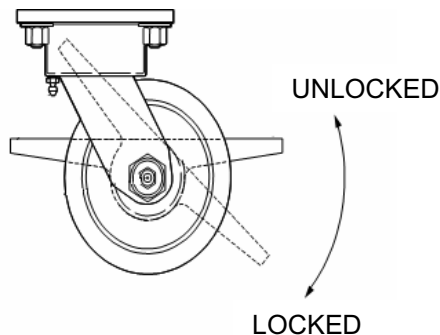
Locked and Unlocked position for the Caster Assembly.
